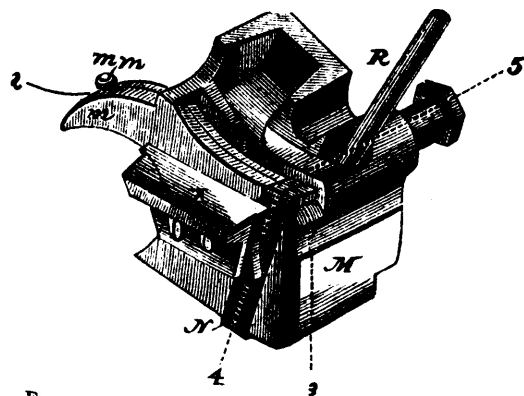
AUTOMATIC SOLDERING MACHINE.
